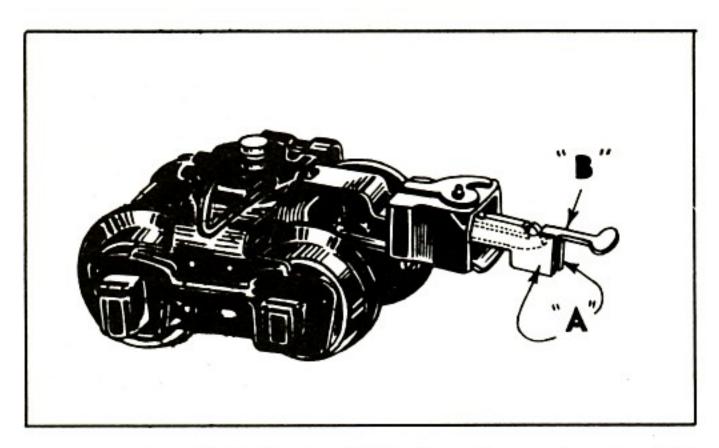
Old Style 'TT' Truck equipped with Model 'A' TT-100 Coupling Adapter.
